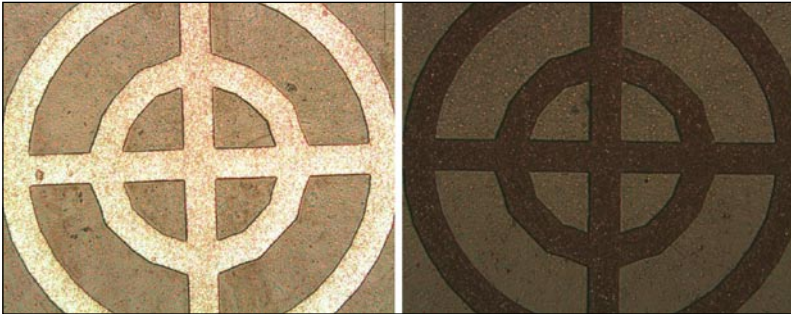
Tape tests on solder mask, scrubbed copper surface: nickel-gold plating (left) and immersion tin plating (right)
